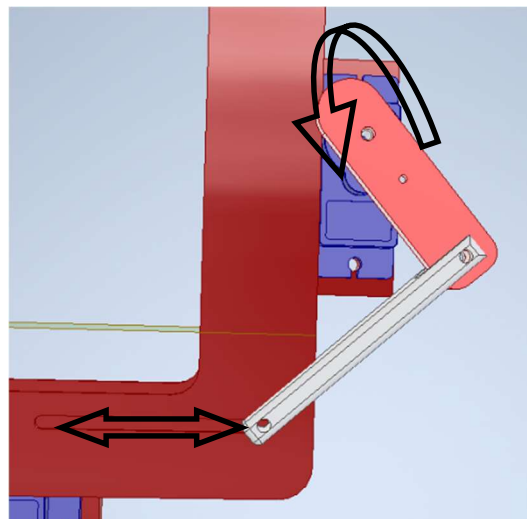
Side view of bolt mechanism assembly, with arrows illustrating slider crank mechanism
